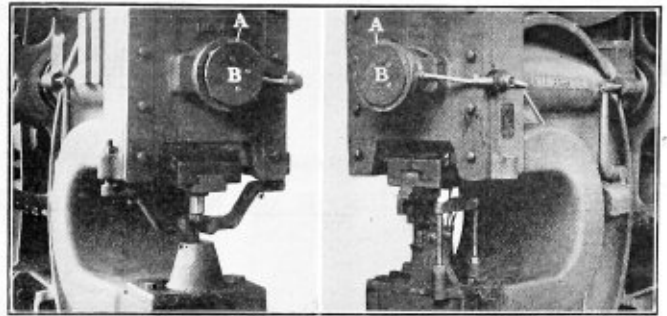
Control Head in Adjusting Position on Punching Machine. (Right) Shearing Machine with Control Head in Operating Position
